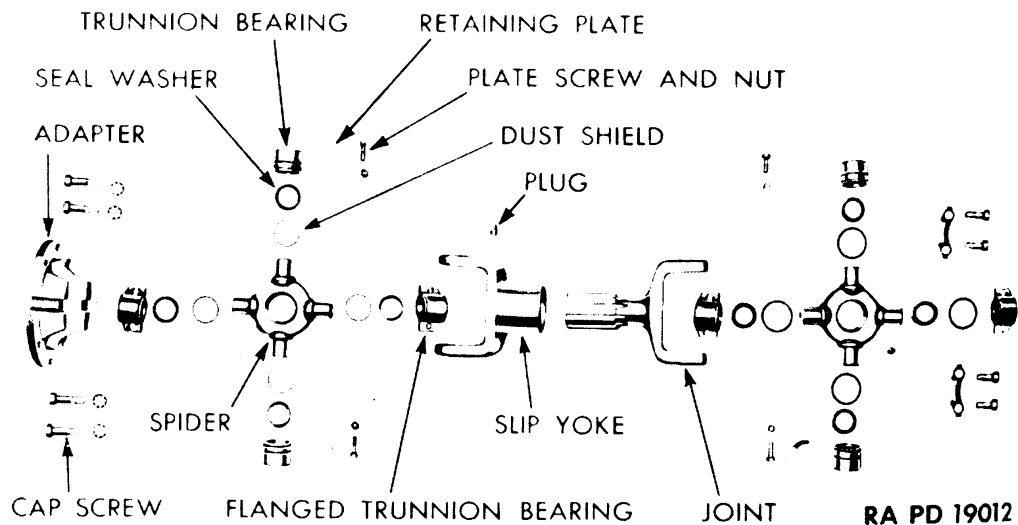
Rear Axle Propeller Shaft — Disassembled
